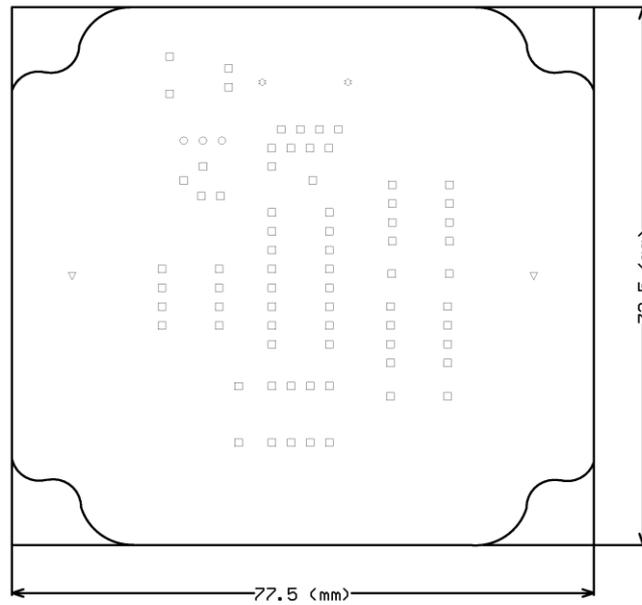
SENSOR BOARD'S DRILL DRAWING LAYER.
